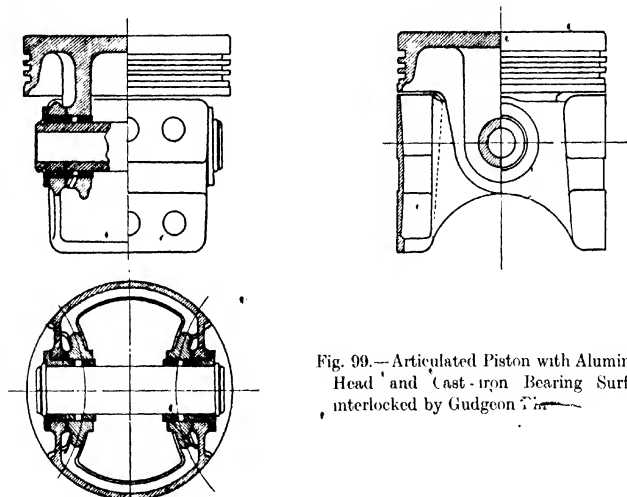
Articulated Piston with Aluminium Head and Cast-iron Bearing Surfaces interlocked by Gudgeon Pin
